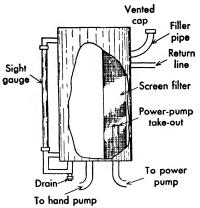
A schematic drawing of a typical hydraulic storage tank installation.
